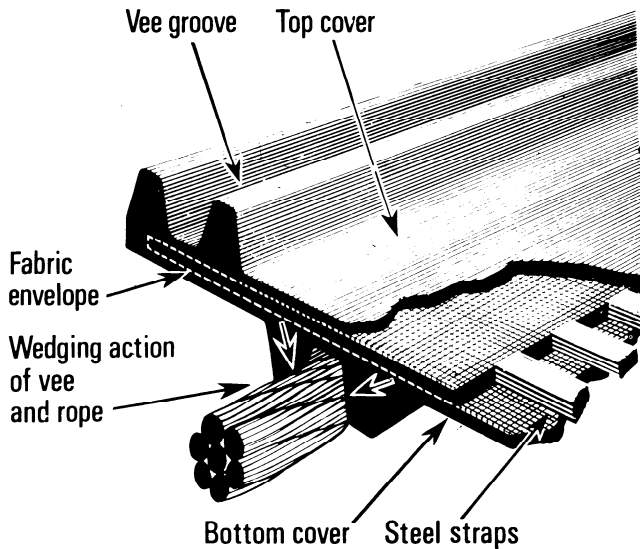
Cable belt conveyor. Typical cross section.
